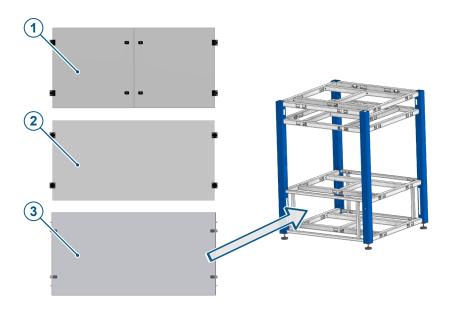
Double side-hinged door, screw-in panel and hook-in panel options
